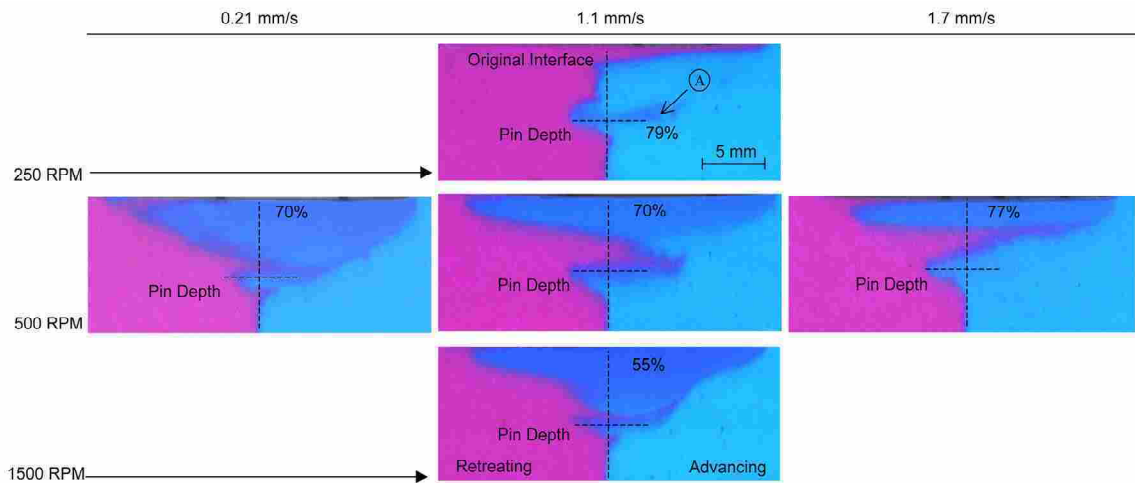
Plasticine welds performed at 250, 450, and 1500 rpm and tool traverse speeds of 0.21, 1.1, and 1.7 mm/s with a threaded pin.
